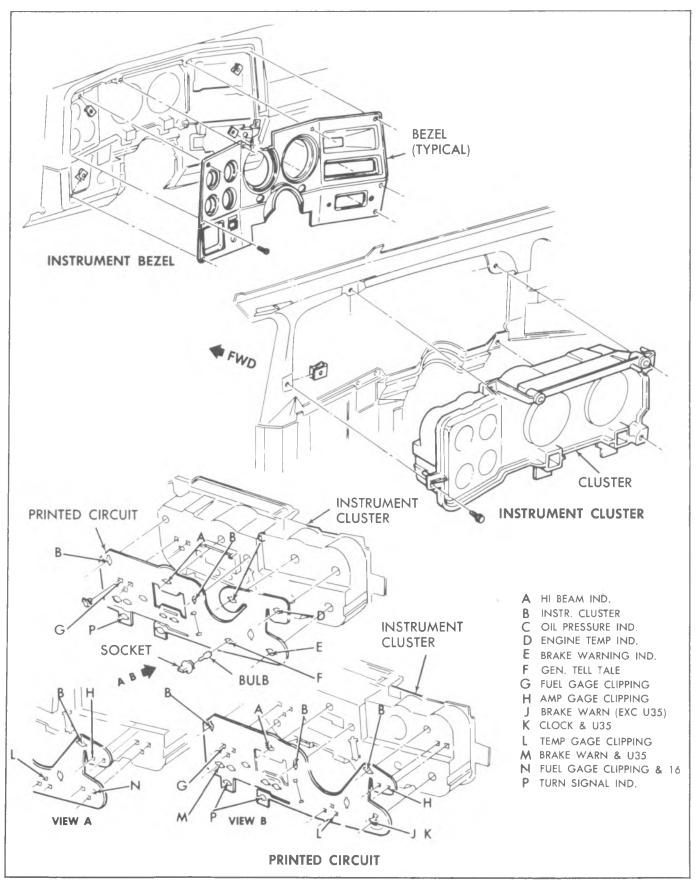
Instrument Cluster Assembly (C-K Models)
